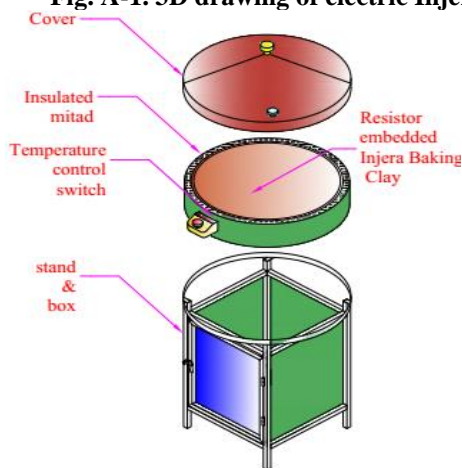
Exploded drawing of electric Injera baking mitad.
